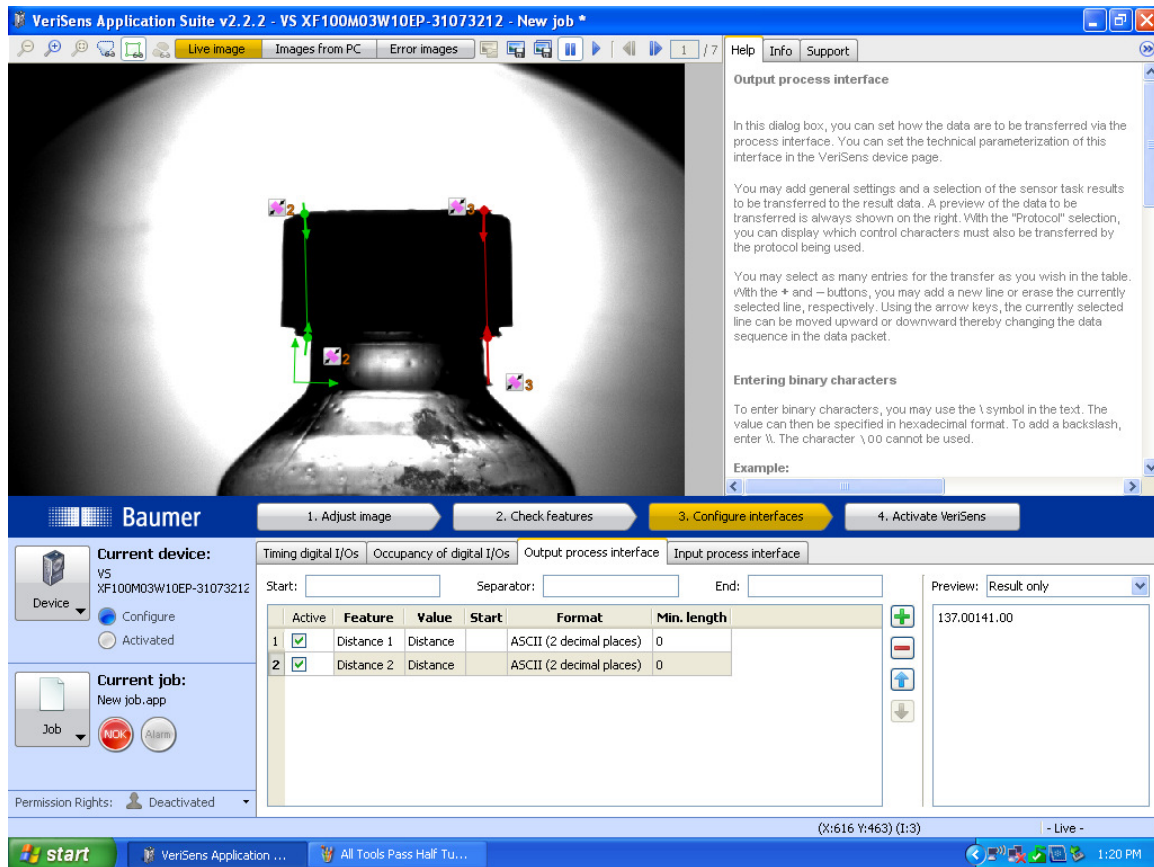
1/4 TURN OPEN, INSPECTION FAILS
